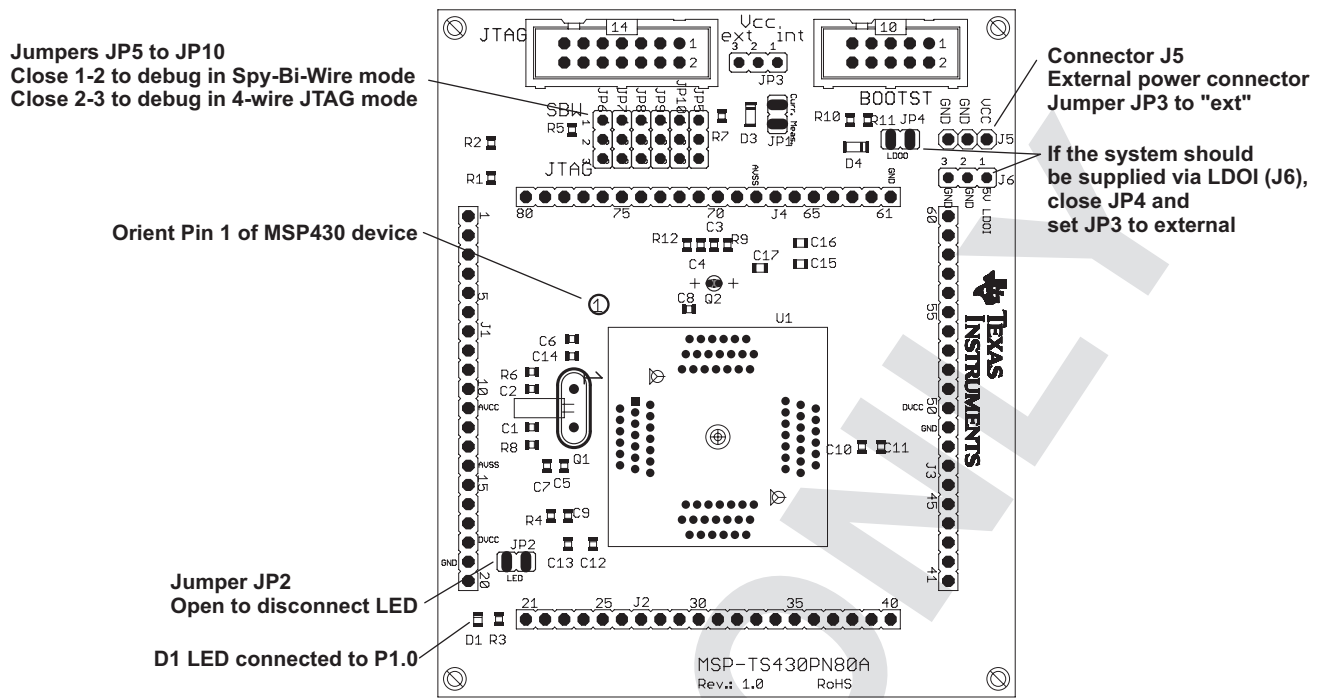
MSP-TS430PN80A Target Socket Module, PCB
